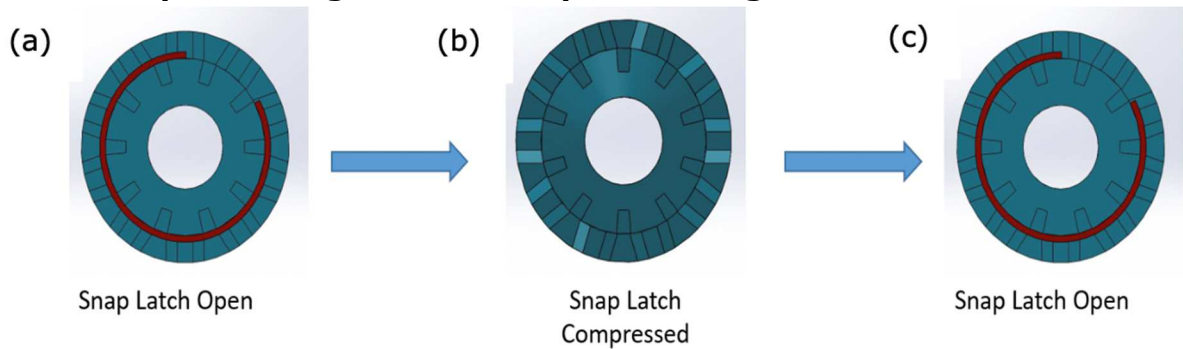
(a) Snap Latch Ring assembled onto Pin (b) Snap Latch Compressed into Pin while Pin is inserted into Box (c) Snap-Latch Ring relaxing back to original position locking Box and Pin together
